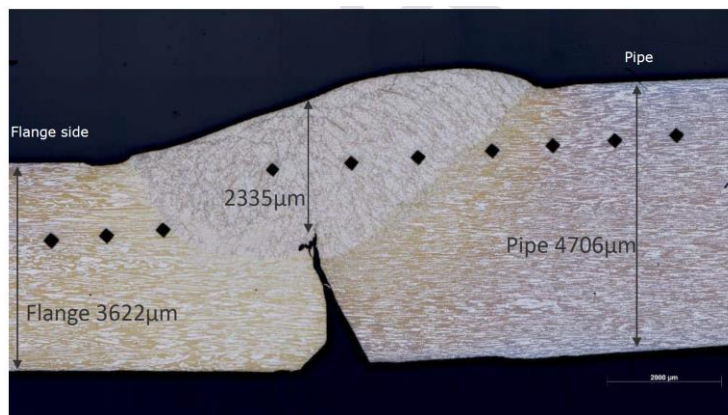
Metallographic image of the fracture site on the pipe nozzle, showing lack of penetration in the weld. The photograph belongs to Engie E&P
